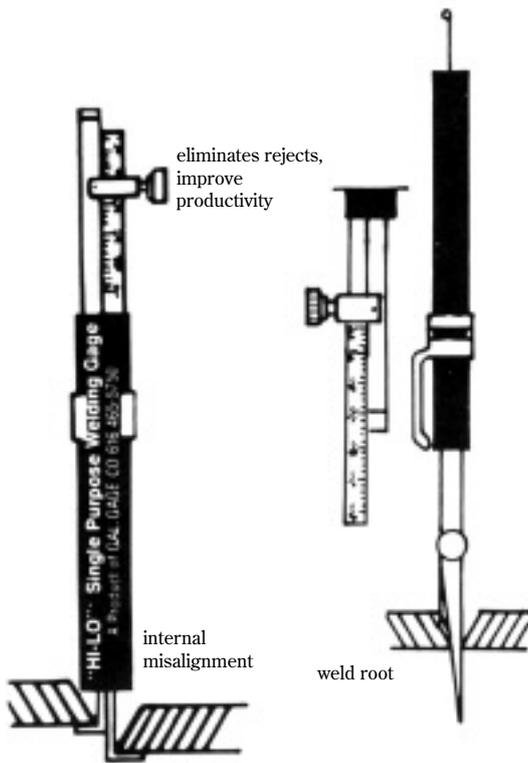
Two types of single-purpose weld gauges. The gauge at left measures internal misalignment; the gauge at right measures the size of the weld root.
